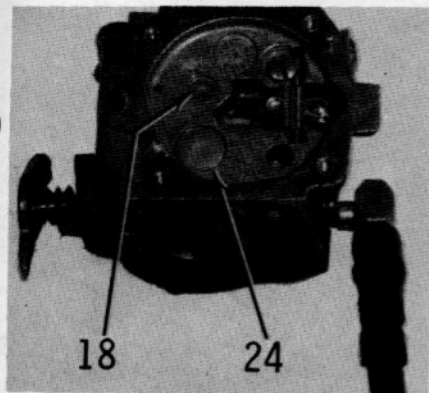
View showing location of welch plugs (18 & 24—Fig. S12).
